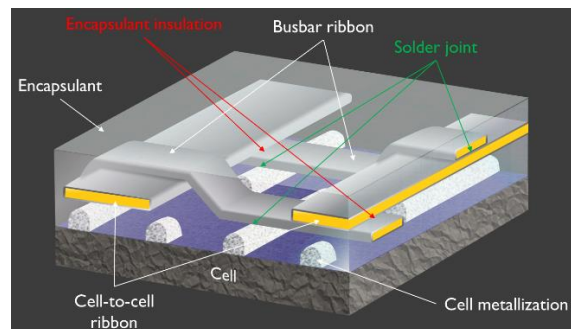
Cross-section drawing detail of 3D-interconnect after lamination
